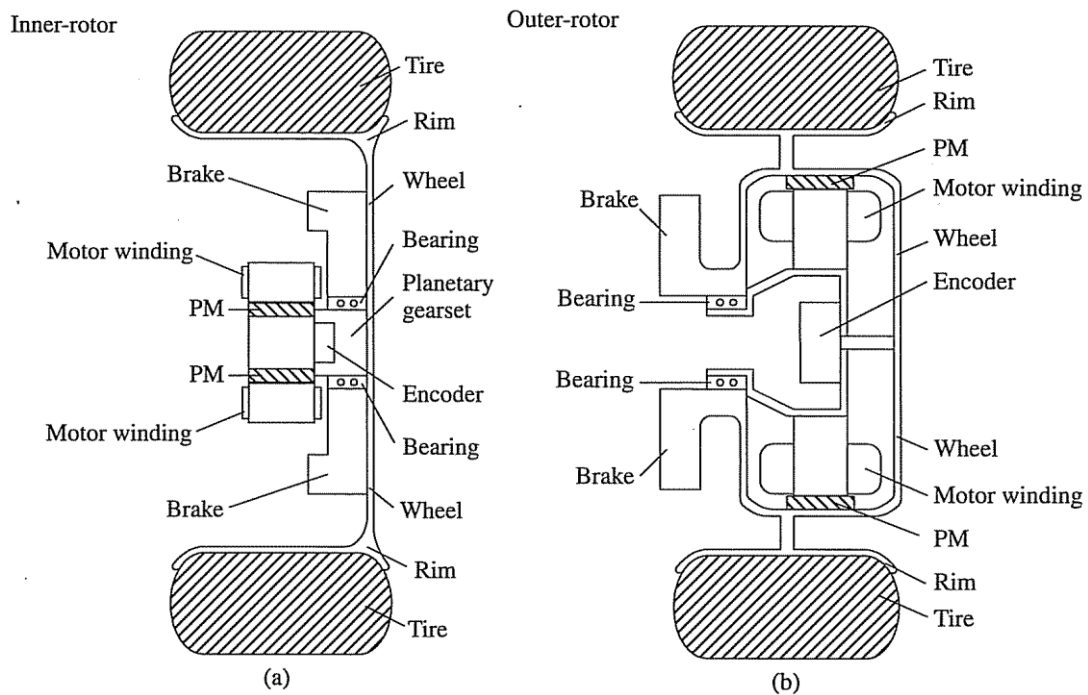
In-wheel drives. (Courtesy of Hiroshi Shimizu.)
